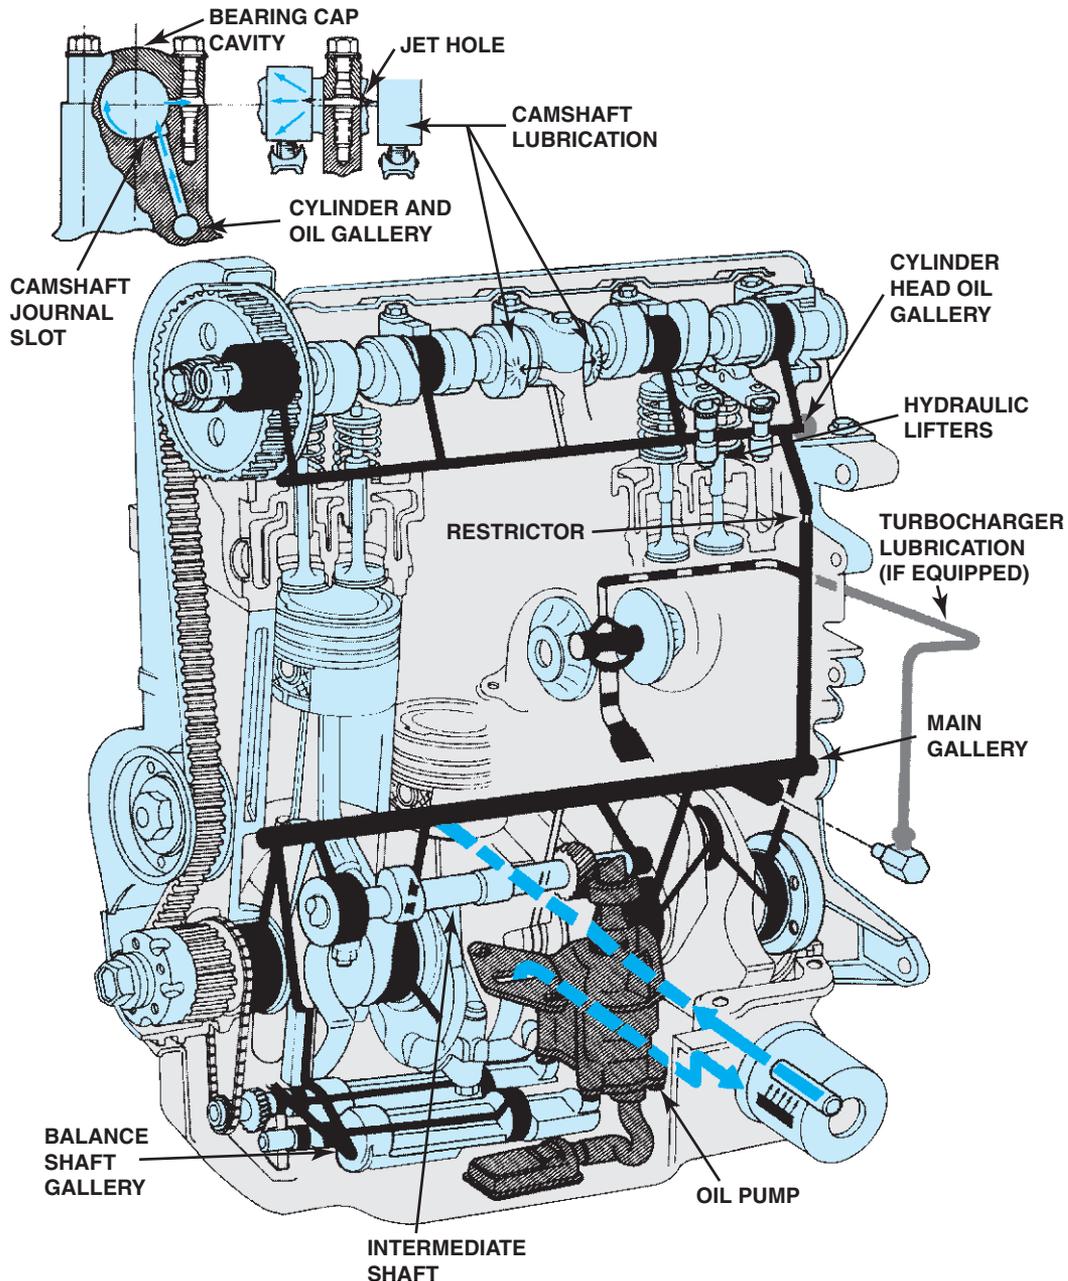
An intermediate shaft drives the oil pump on this overhead camshaft engine. Note the main gallery and other drilled passages in the block and cylinder head.
